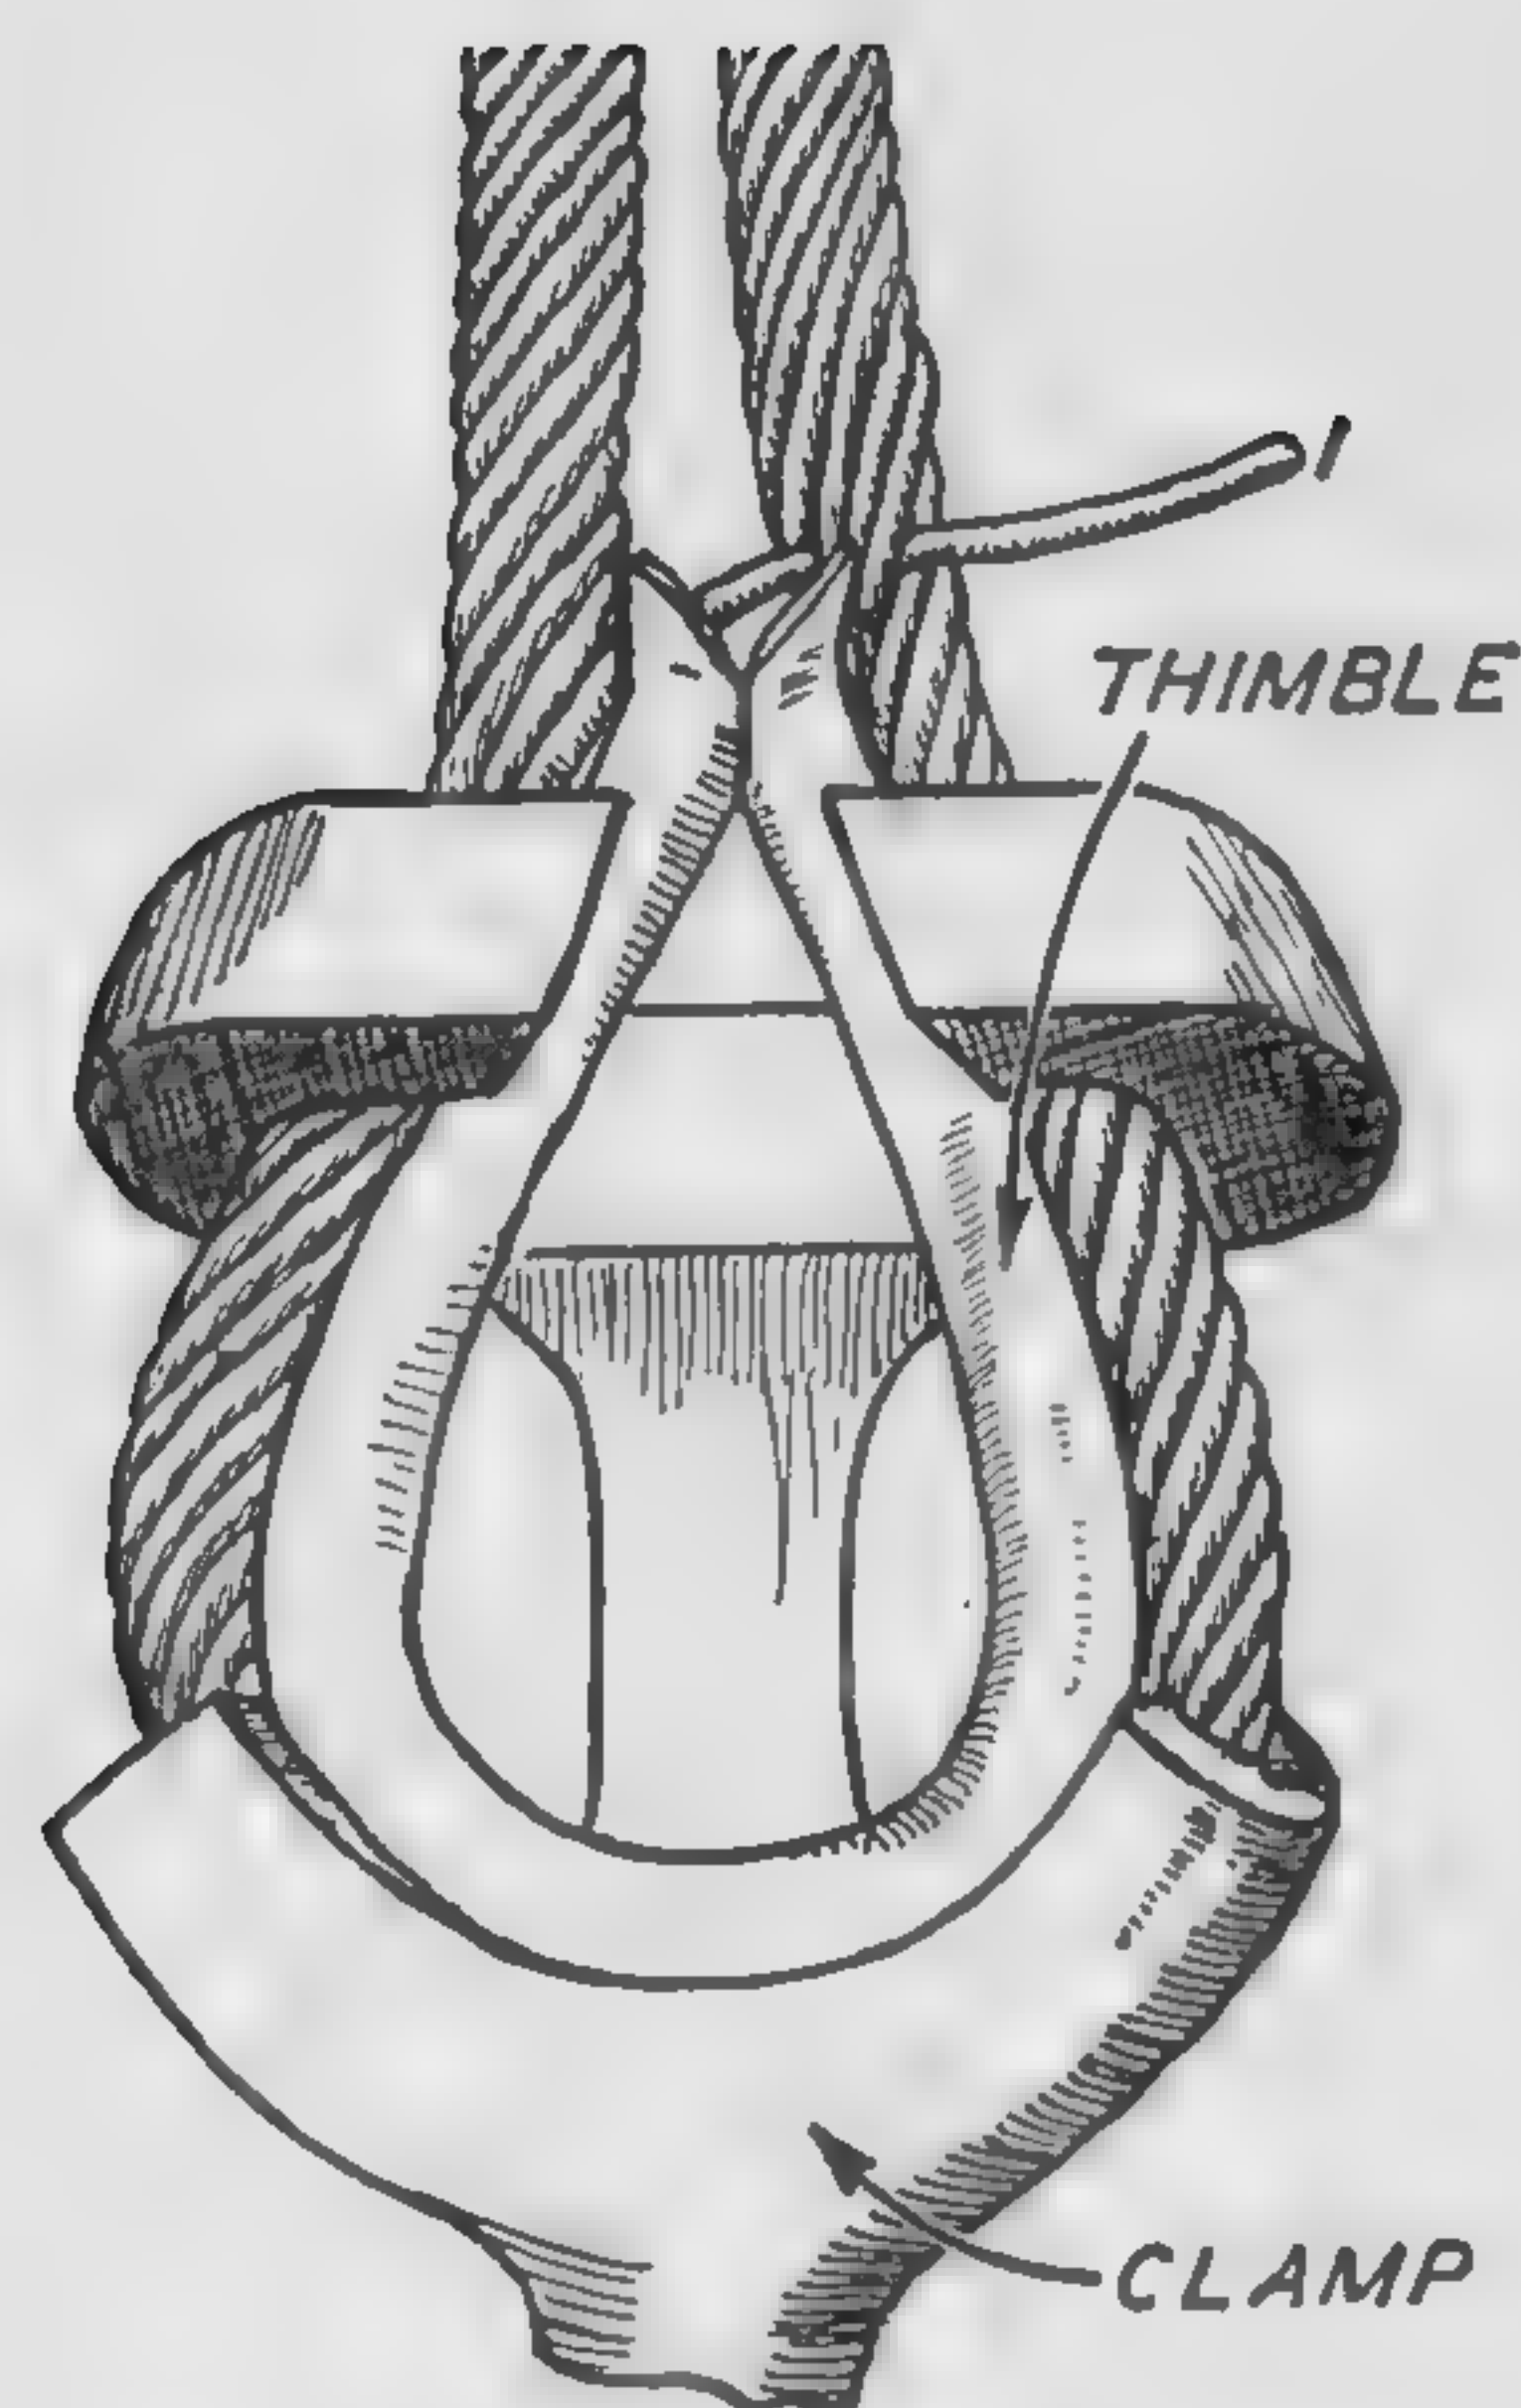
Cable and Thimble in Clamp, Showing Step 1 of First Tuck
